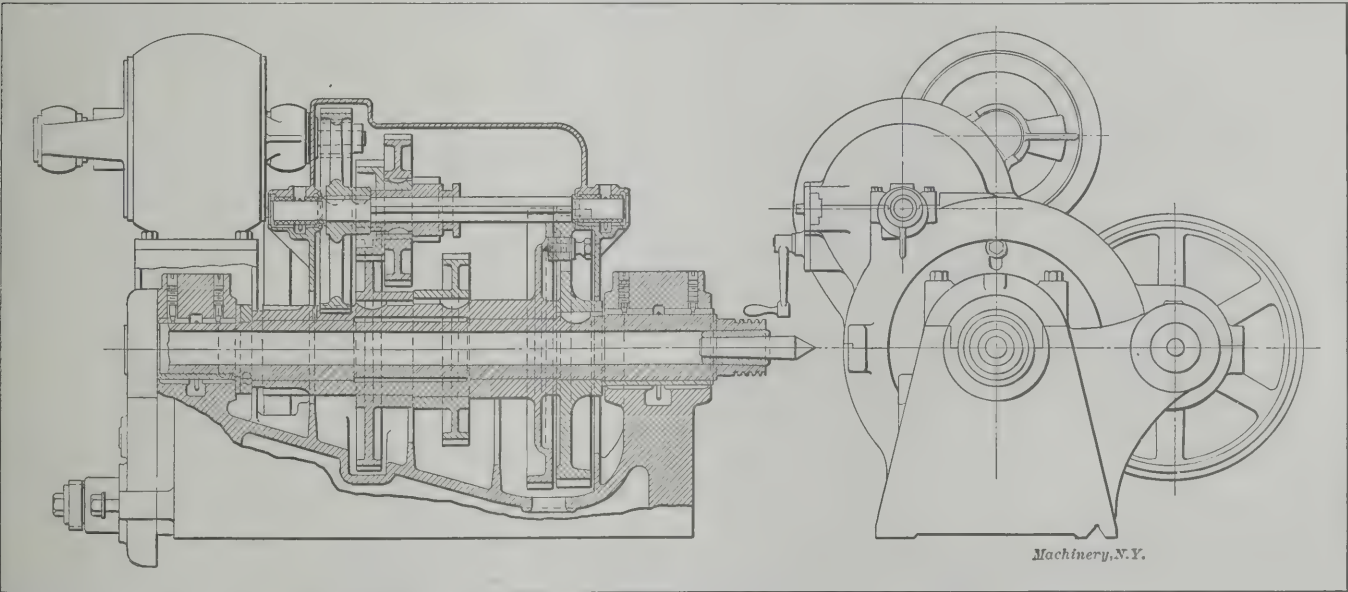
View of the Headstock of the Springfield Motor-driven Lathe showing Motor and Speed Change Mechanism
